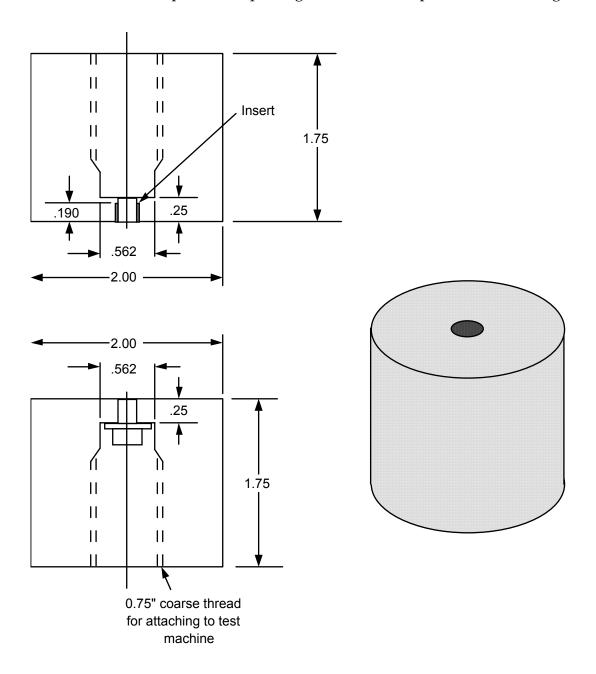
Test Specimens, with Bolt Configuration Shown.
